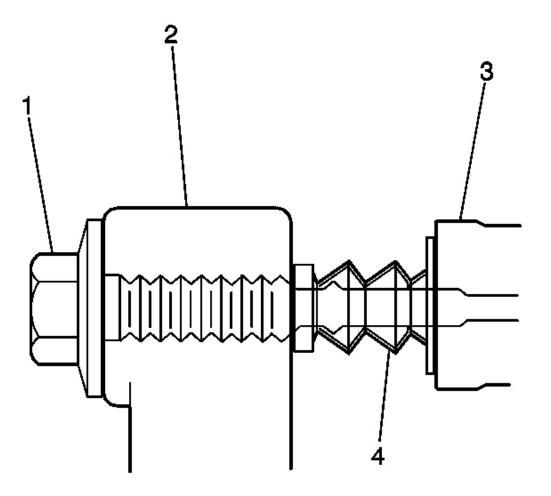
Disc Brake Pads & Caliper Mounting Bracket - Rear (1500 Series Pickup) Courtesy of GENERAL MOTORS CORP.
